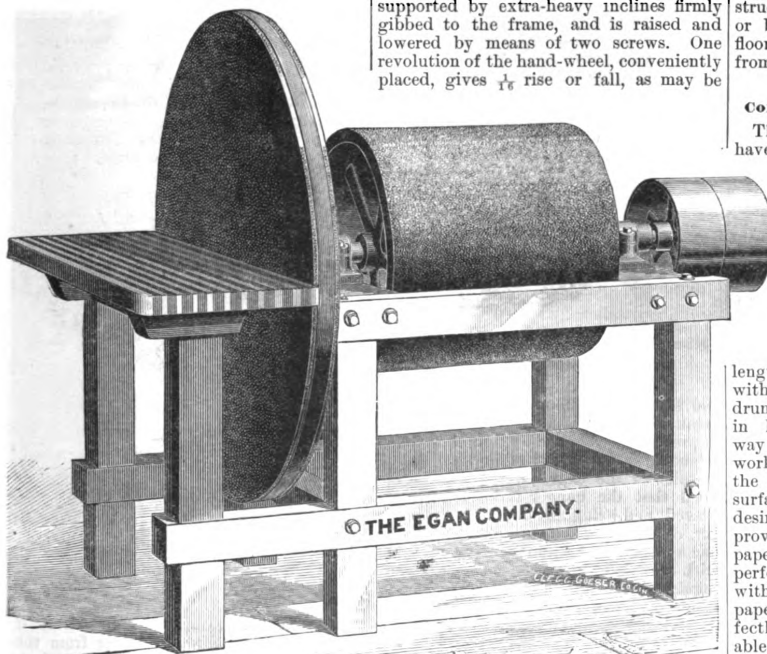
Combined Disk and Drum Sander, Built by the Egan Co.
